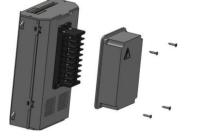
Step 5: Remove the terminal cover by unscrewing the 4 screws and unplugging the wiring on the terminal. Replace with a new control box.
